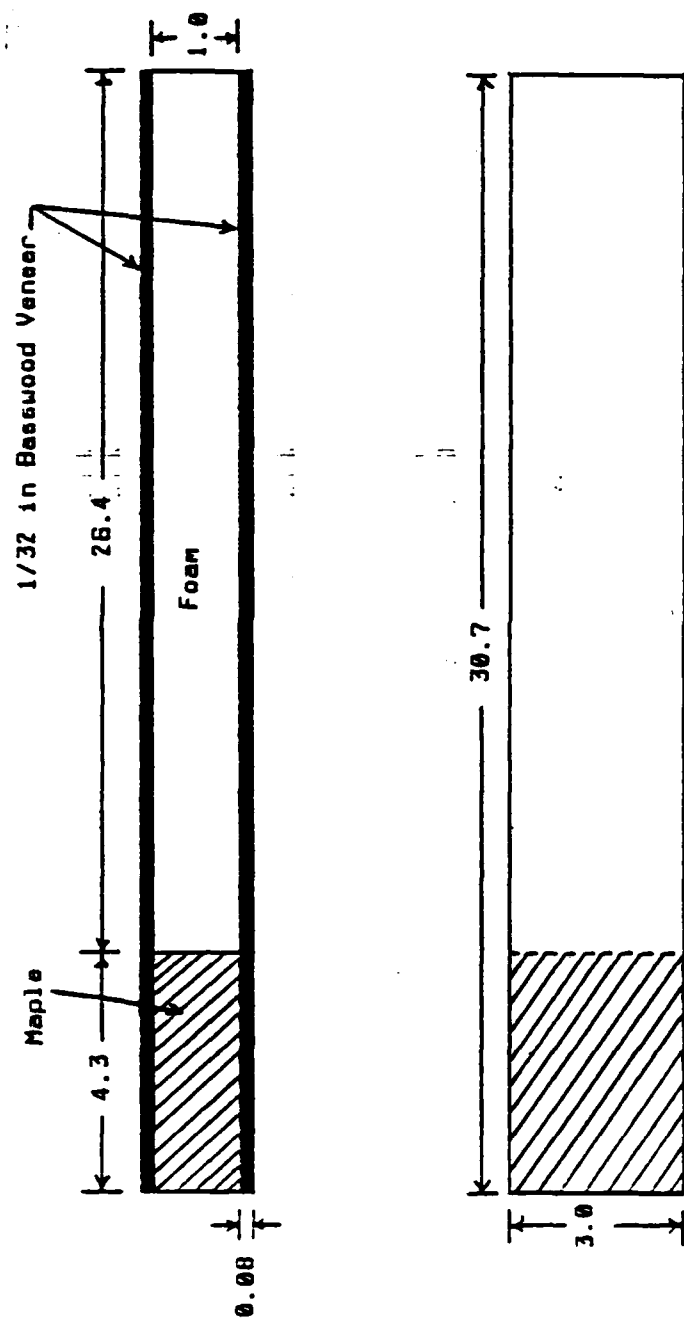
Design of Closure Paddles. Dimensions in cm.
